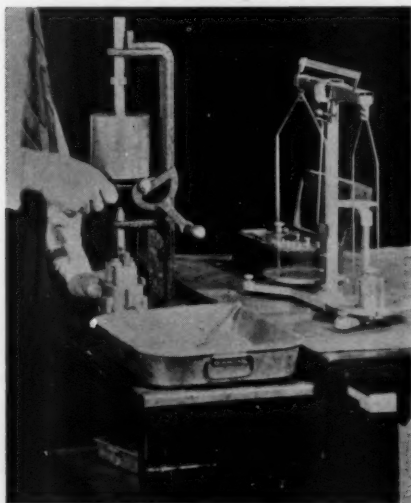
RAMMING TENSILE CORE SPECIMEN WITH A.F.A. SAND RAMMER.
